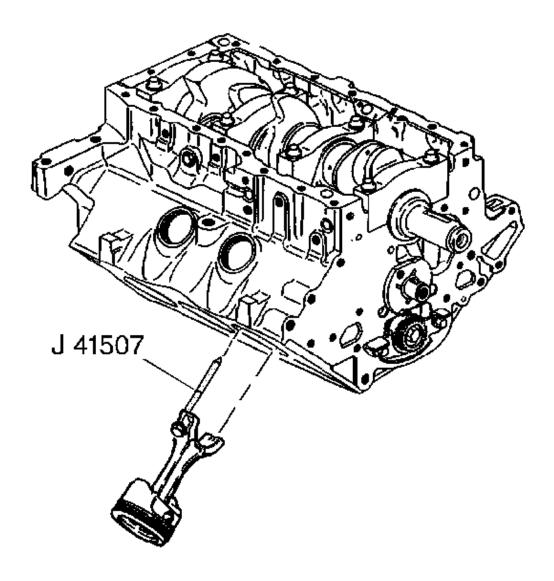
Installing J 41507 To Connecting Rod Courtesy of GENERAL MOTORS CORP.
